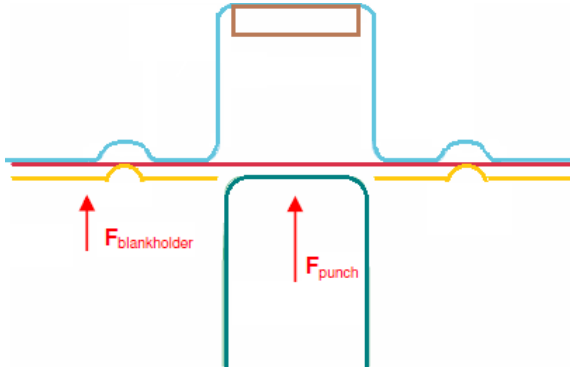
Tools and blank in initial position before drawing [17].
